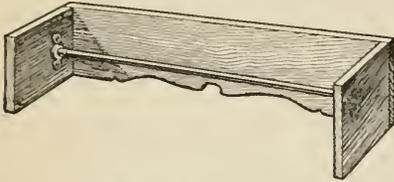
Rear view of a wooden valance board with the curtain rod in place.
